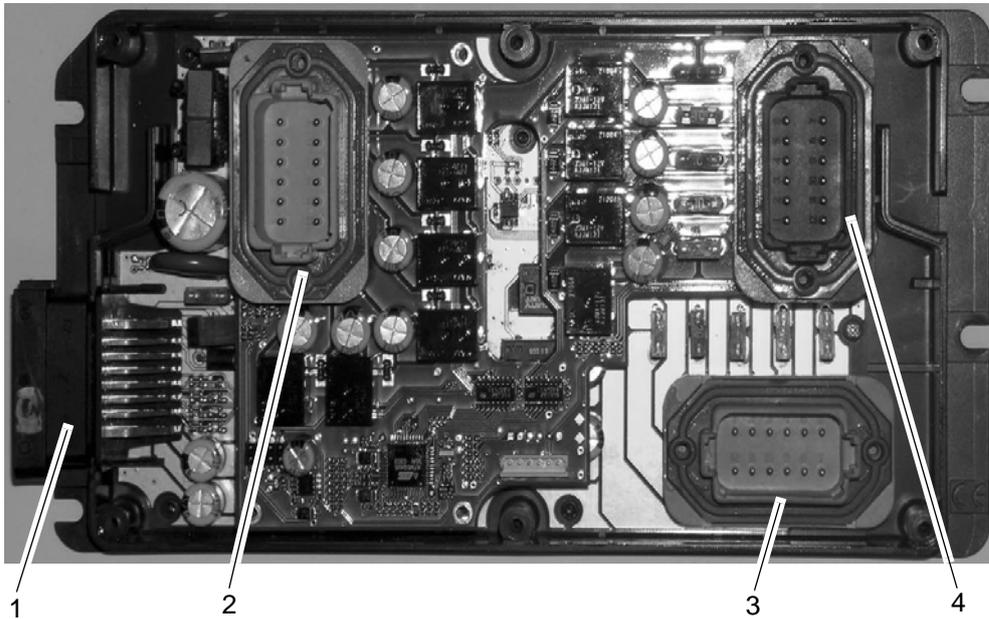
Internal Layout of a Platform 2 Electronic Control Module, showing PCB 1 and PCB 2
